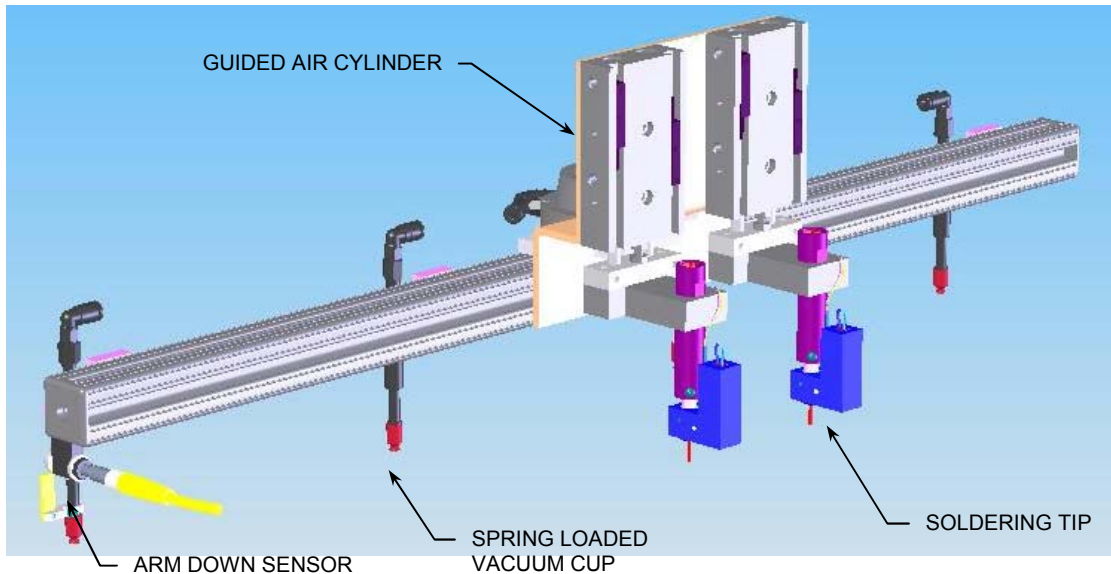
Improved robot end effector with pick-and-place and soldering tools.
